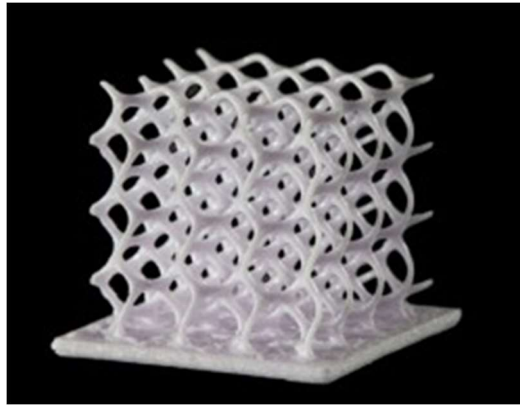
Complex ceramic design that would be impossible to machine [41].
